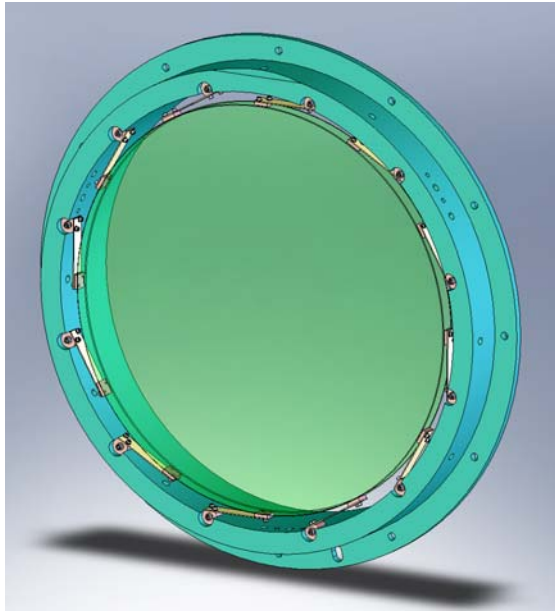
A Representative Lens Cell Assembly with Multiple Bonded -Flexures and Mounting Ring
